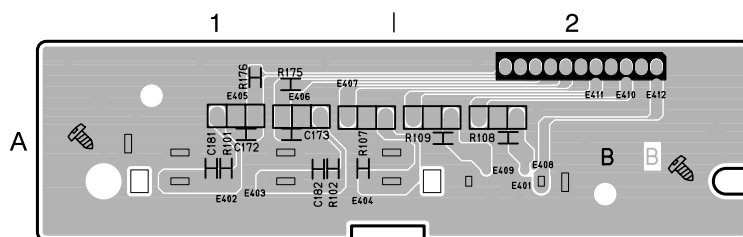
EU55 Front Jack PC Broad (Bottom side)
